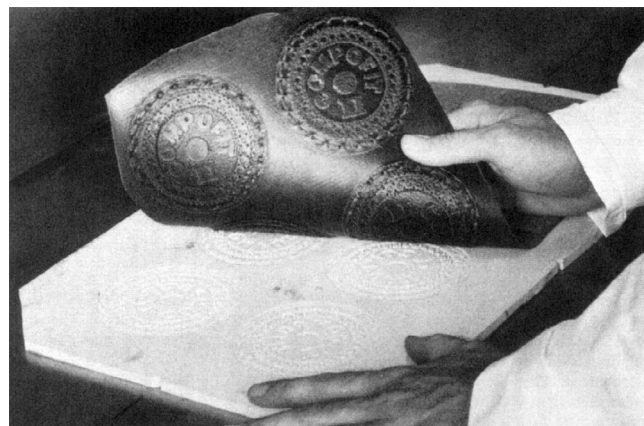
A polysiloxane rubber mould being used to make vinyl sheet with detailed surface[42].
